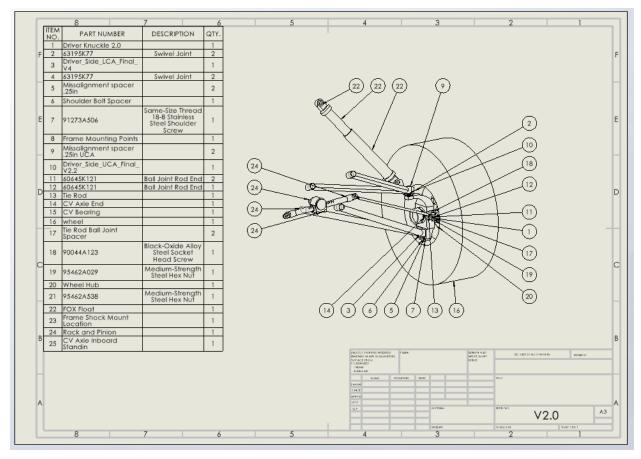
SolidWorks Drawing of Vehicle Front End Assembly
